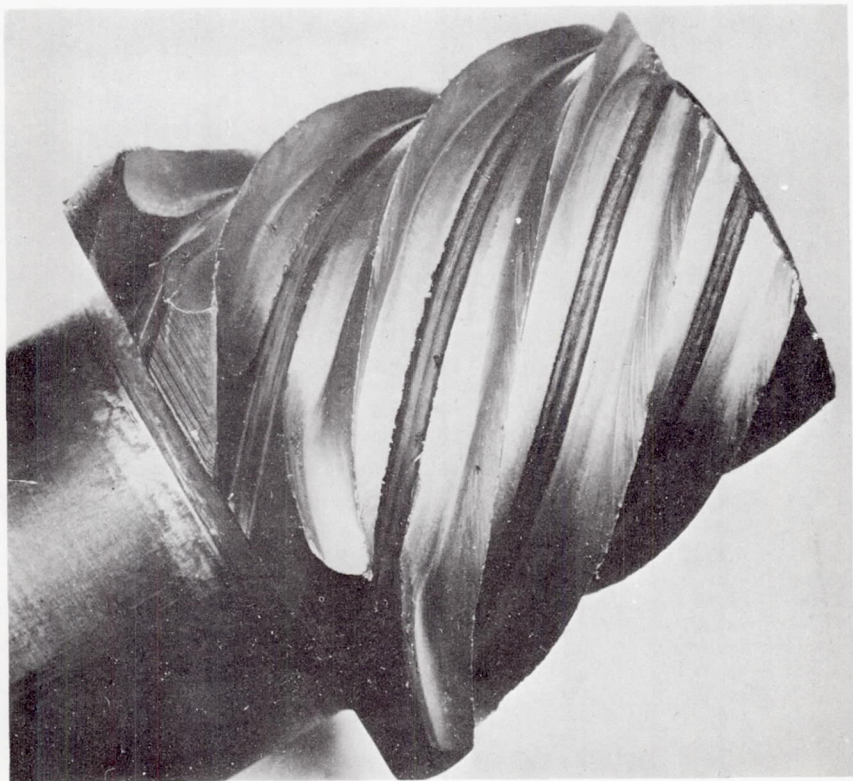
Example of extreme wear on the tooth surfaces of a hypoid pinion. In this case the teeth have worn badly on both sides until there is nearly no tooth left. The fact that the tooth did not ultimately break indicates that the tooth loads were light. The initial failure was caused by a breakdown of the oil film.
